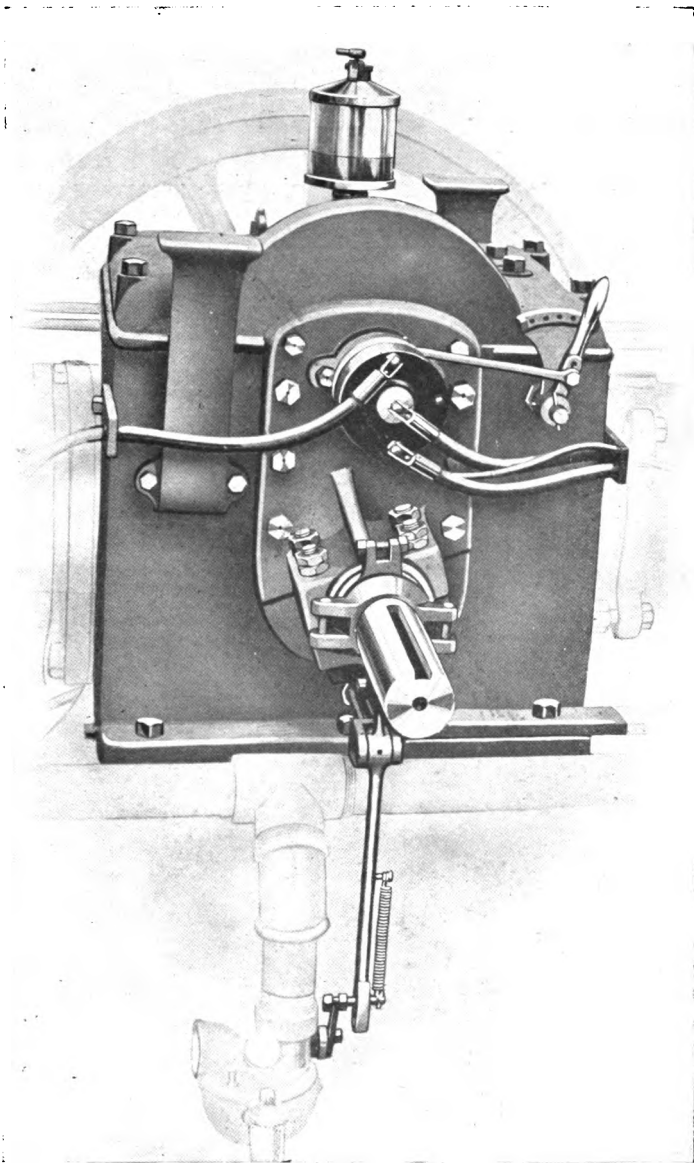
Timer and Throttle Mechanisms of Manley Engines.
